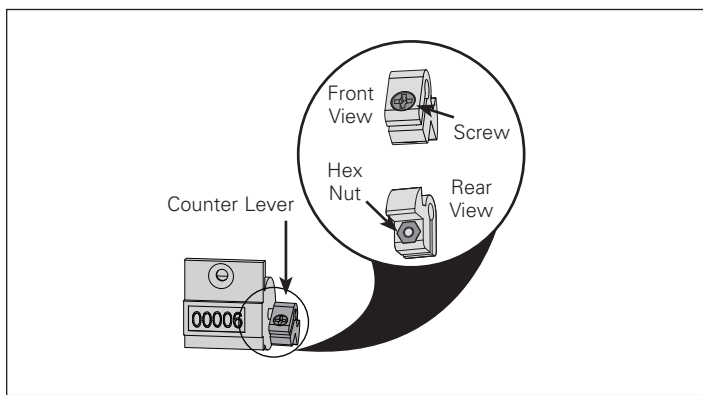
Counter Lever Mounted with Screw and Hex Nut
